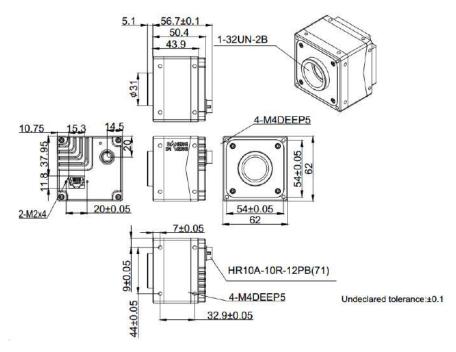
MARS-G-P mechanical dimensions (except MARS-3140-3GM/C-P)
